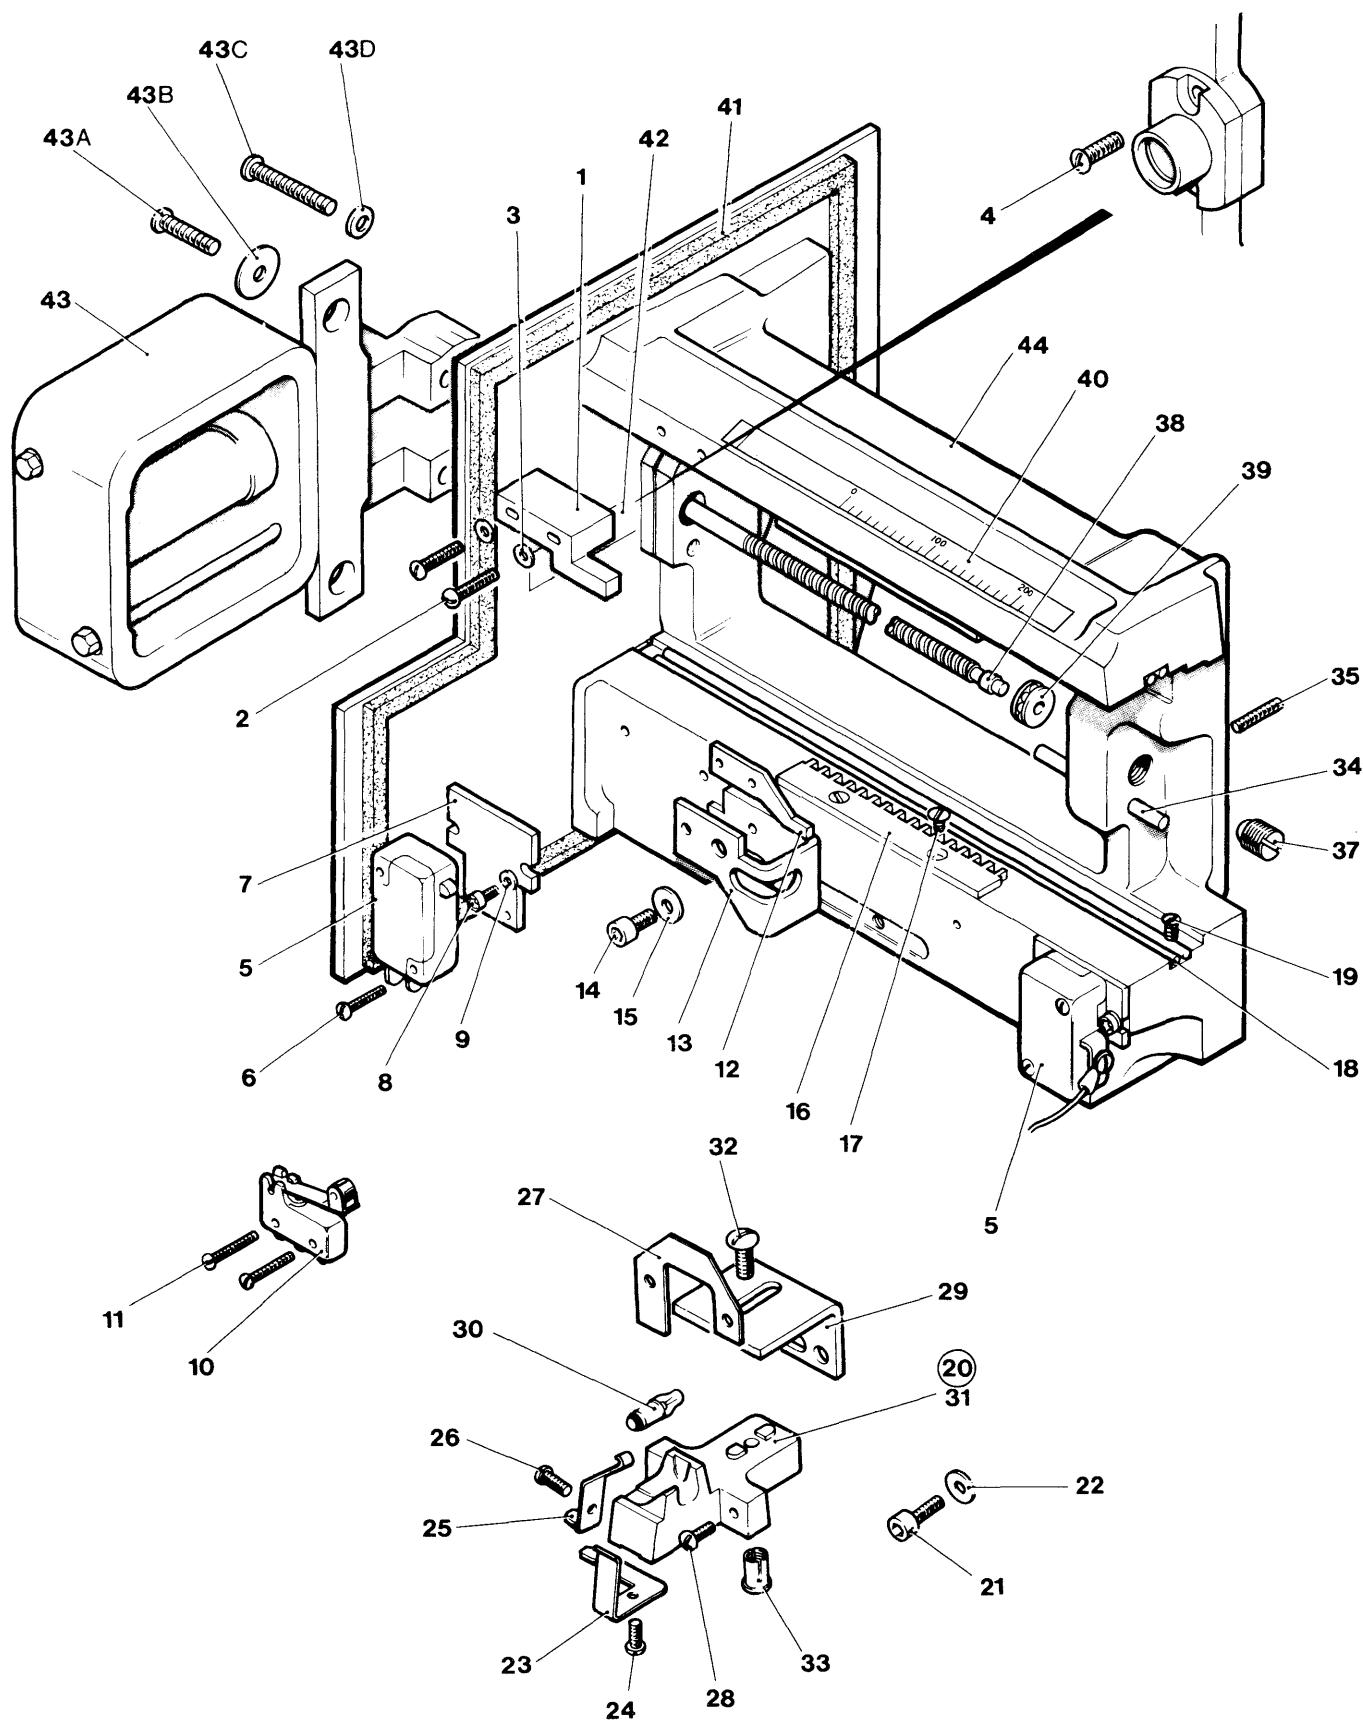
ACTUATOR ASSEMBLY (PART 1 OF 3)
